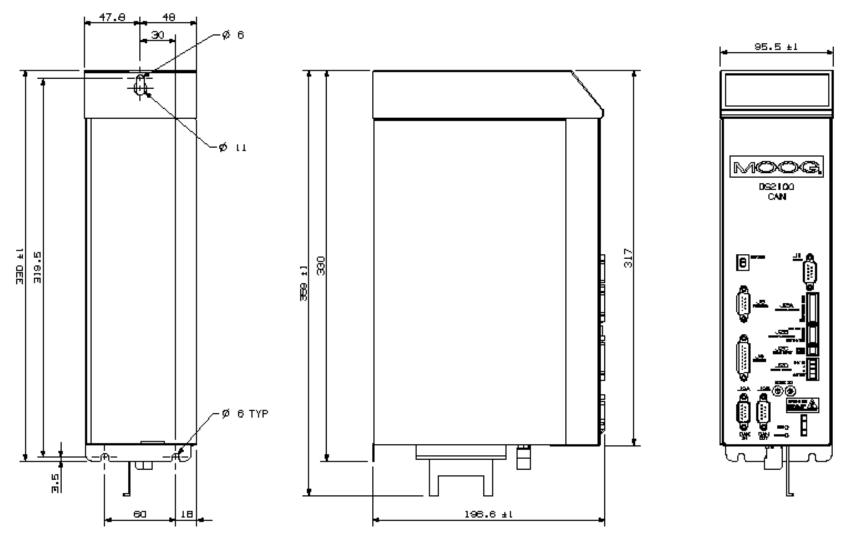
DS2100 A Mechanical & Mounting Dimensions
